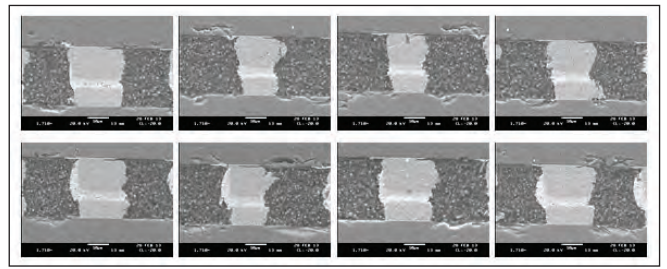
100 % electrical joining of 1600 solder joints per daisy chain
